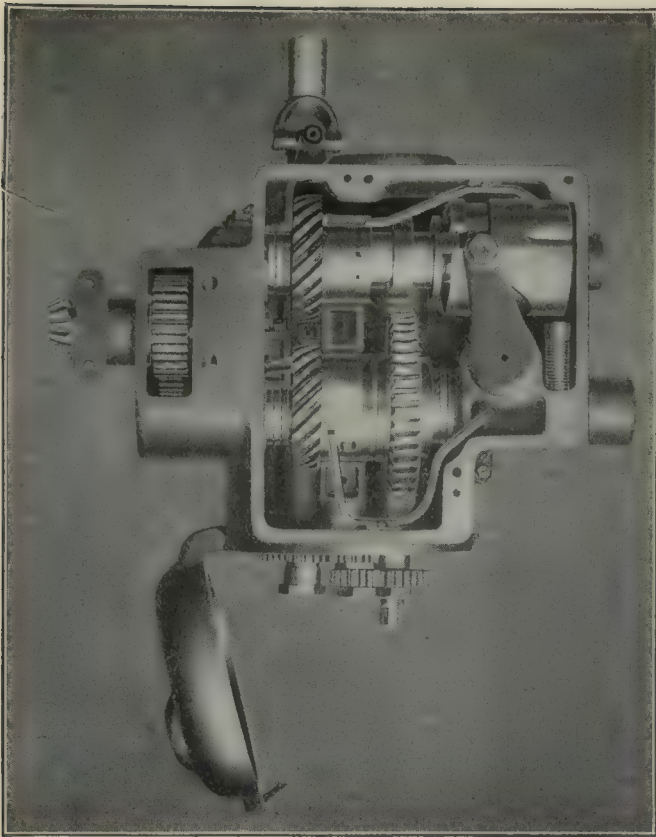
SPINDLE DRIVE GEARING AND FRICTION CLUTCHES
